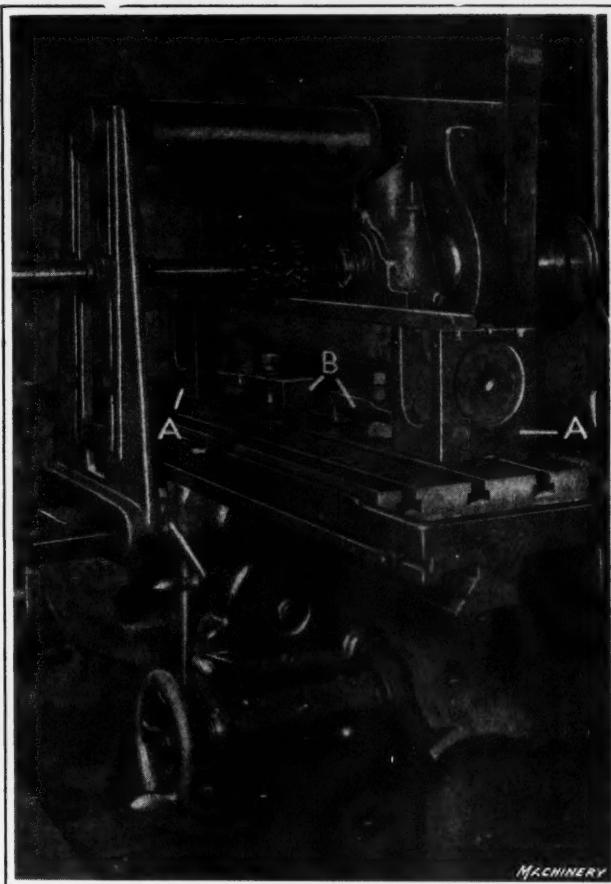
Set-up for milling the Top Bearing Surface of the Lathe Bed
